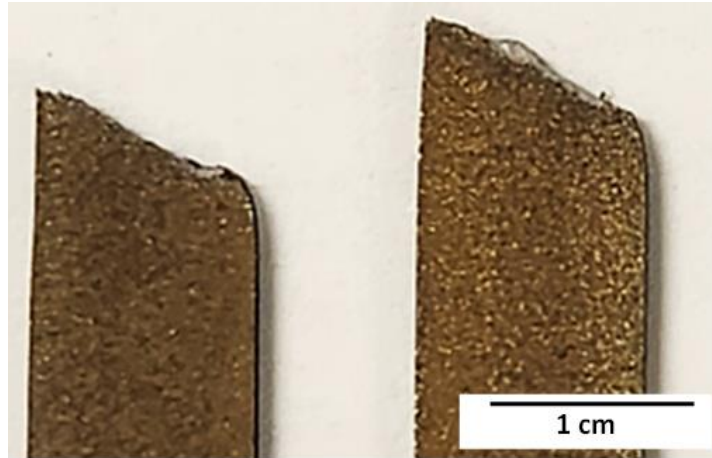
Quasistatic tensile test 23°C fracture sample QRT-C
